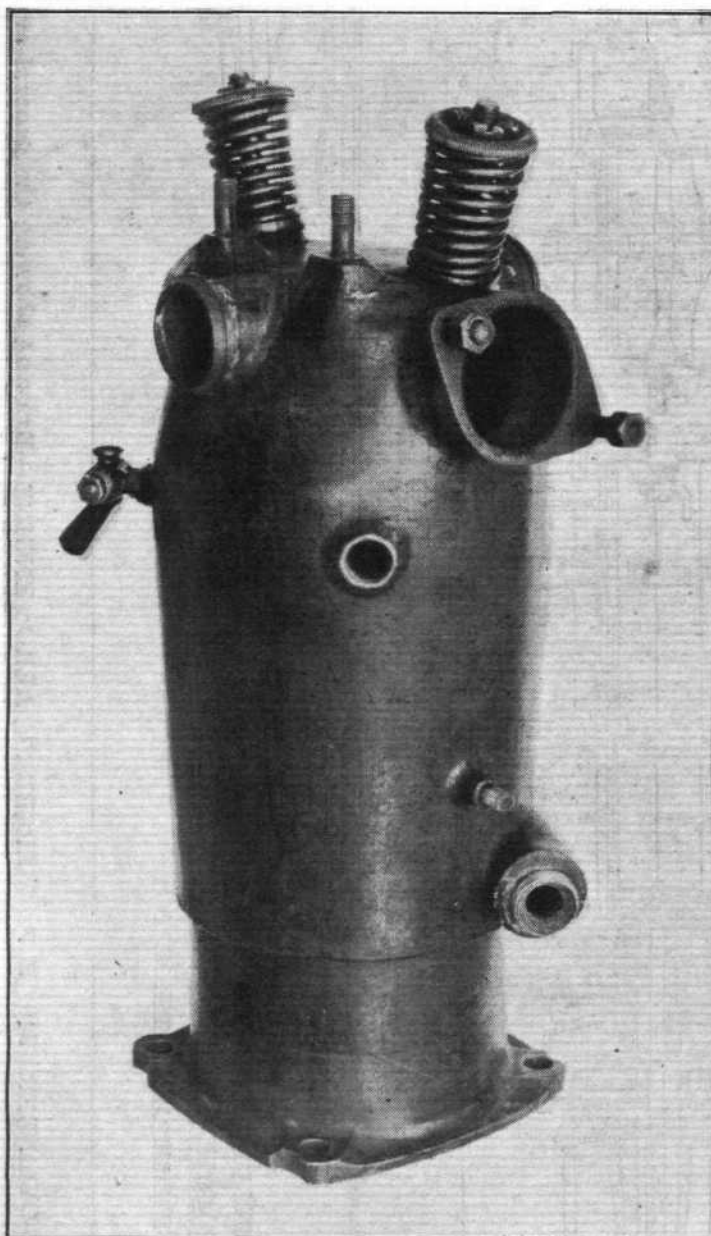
One of the standard type 160 h.p. cylinders, complete with valves, and showing the inlet and outlet water connections welded on to the sheet steel water jackets.
